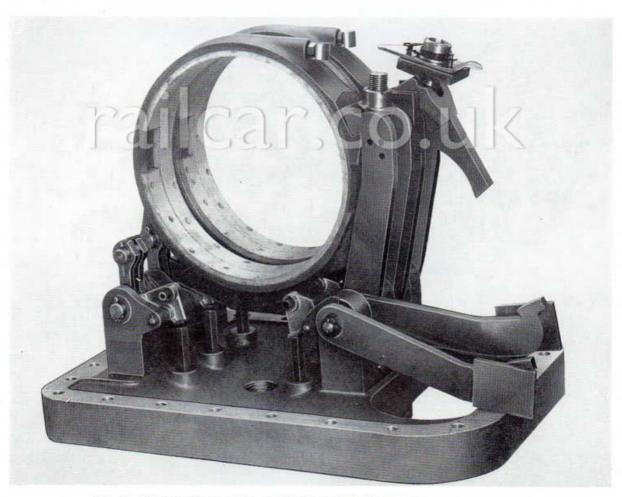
VIEW OF BRAKE BAND ASSEMBLY, HOOKS, CENTRALISERS AND BASE PLATE.
